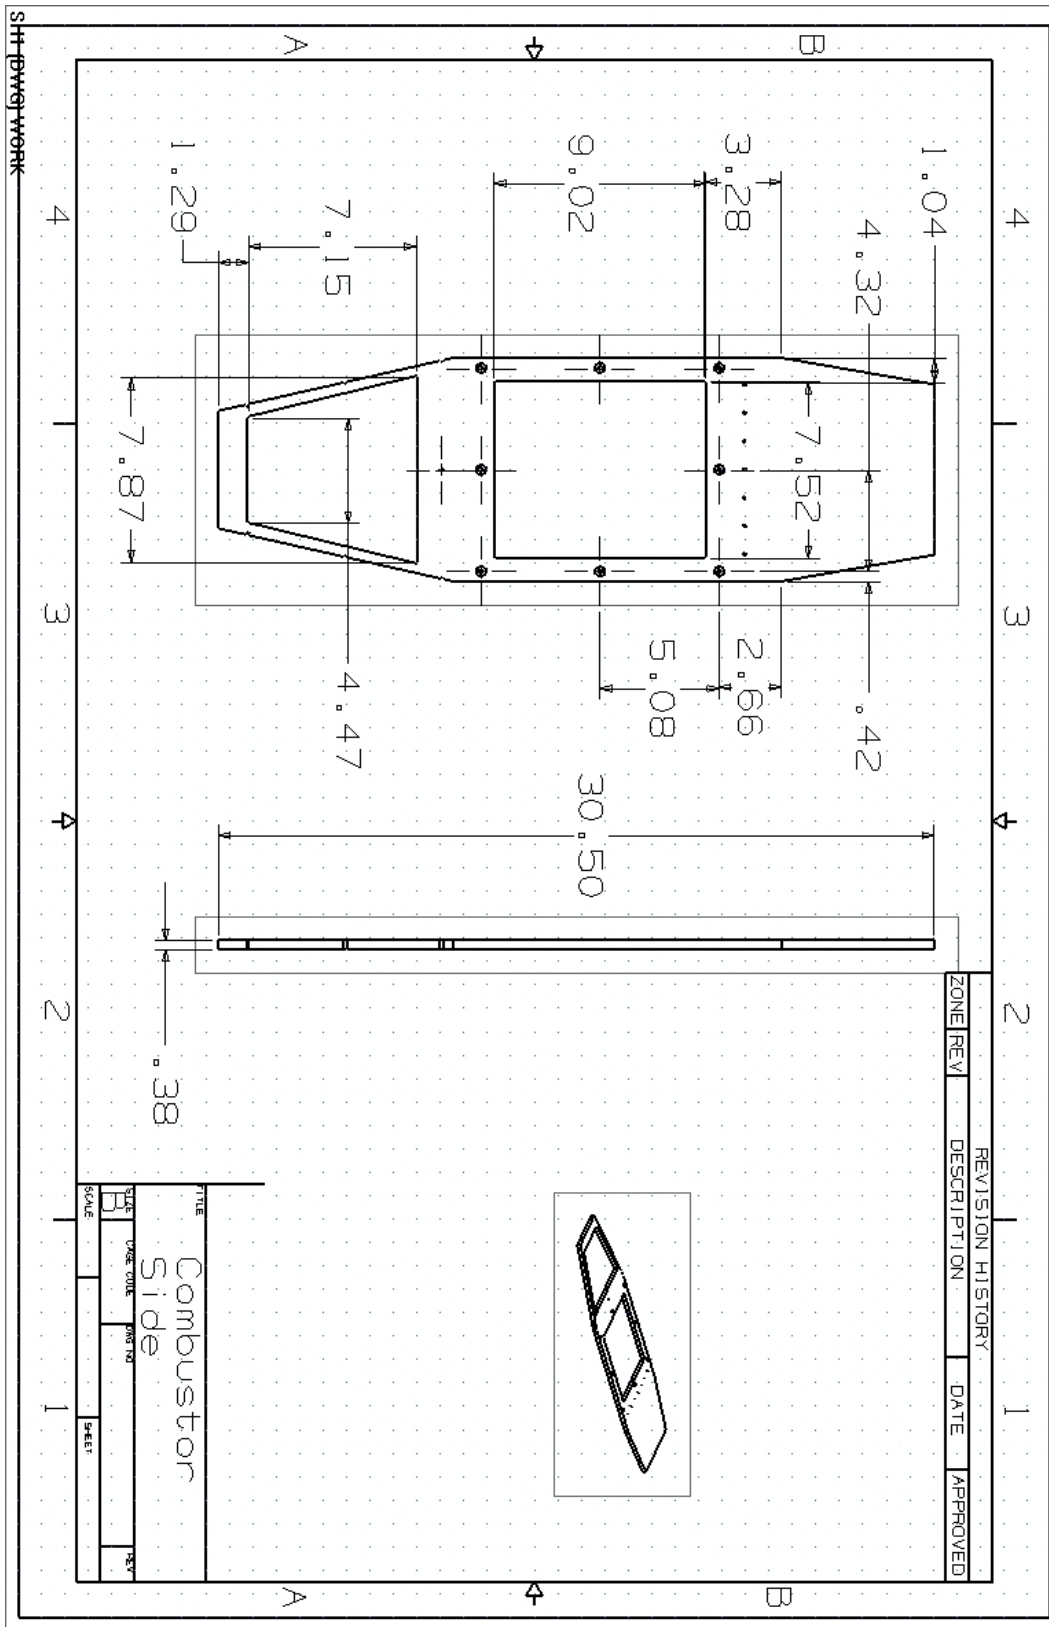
Engineering Drawing of the near side of the Sector Combustor
